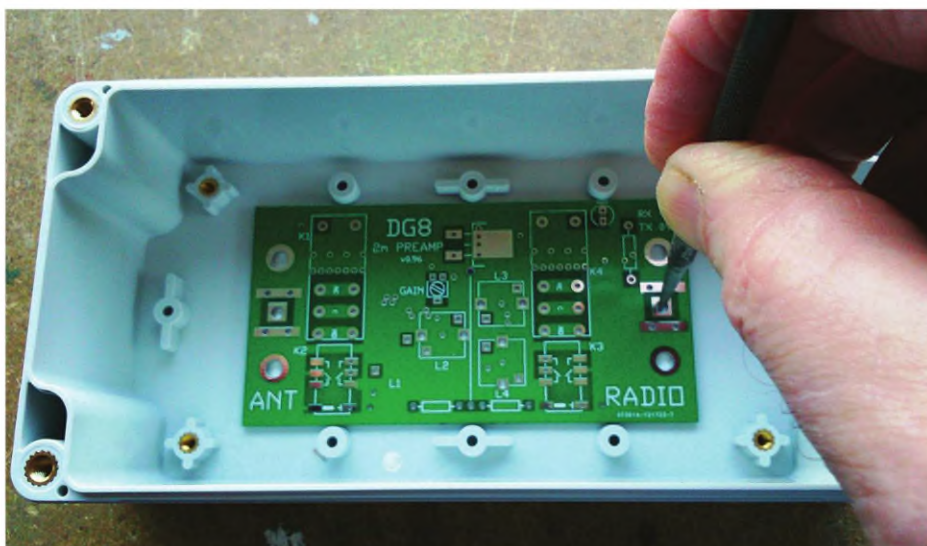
Using the PCB as a template to mark the cable gland holes.
